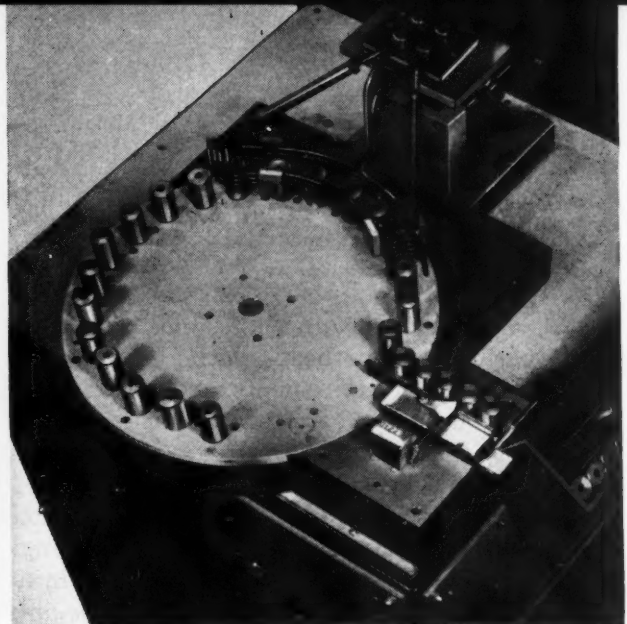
Used with a High-frequency Converter, a Turntable is Essentially a High-production Device. The Unit Shown Handles Six Hundred Steel Bushing Assemblies per Hour, and Automatically Ejects and Counts the Units after They have been Soldered
